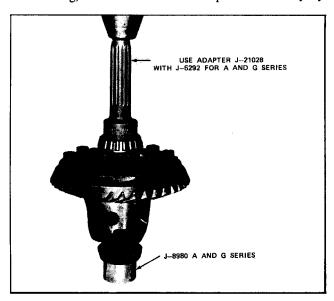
A-25 Installing Left Differential Side Bearing - A and G Series
